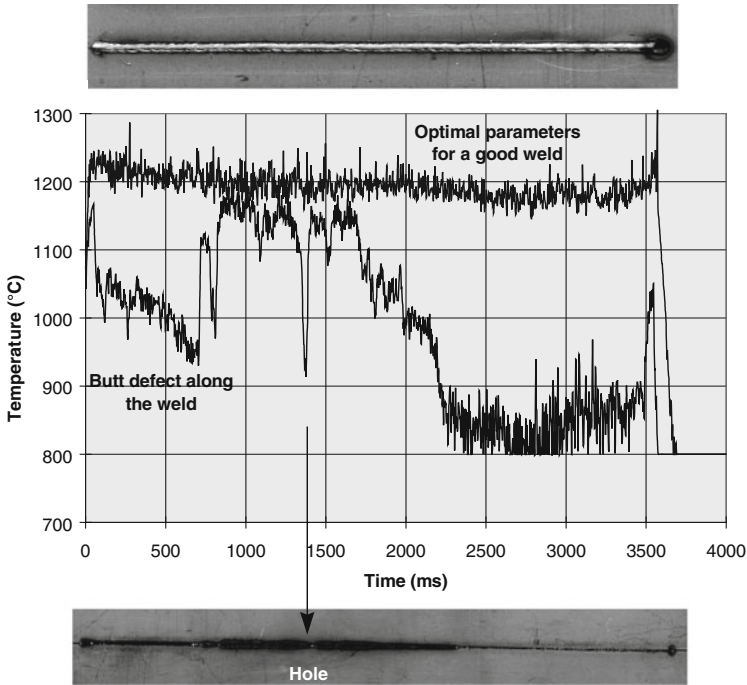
Welds and pyrometer signals obtained under optimum conditions (*up*), with wrong preparation of the flanks to be welded (*down*). Steel plates of 3 mm thickness
